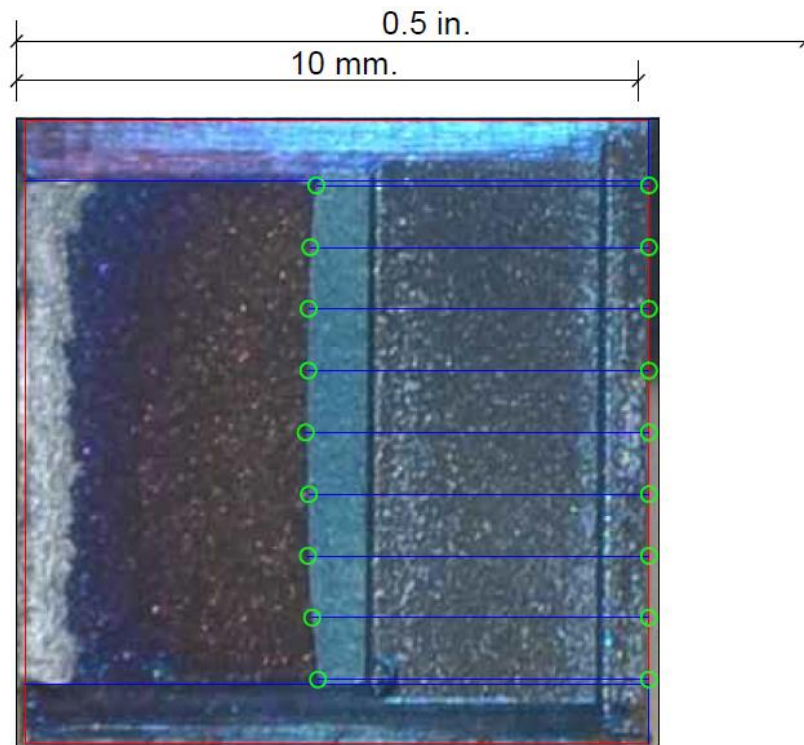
Specimen E9' Fracture Surface
